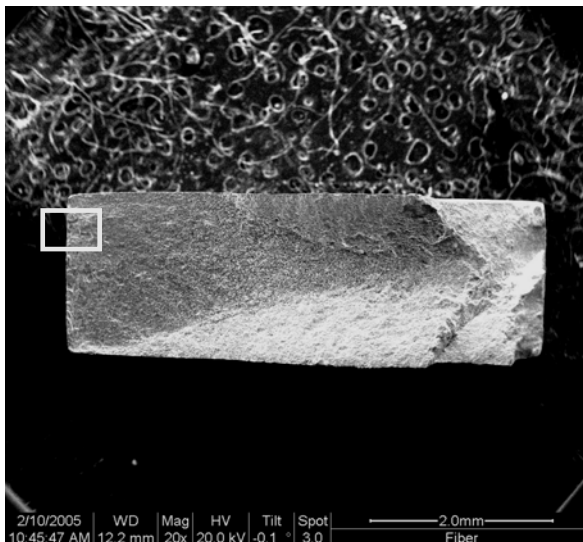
Specimen Ti-03, overall view of fracture surface
